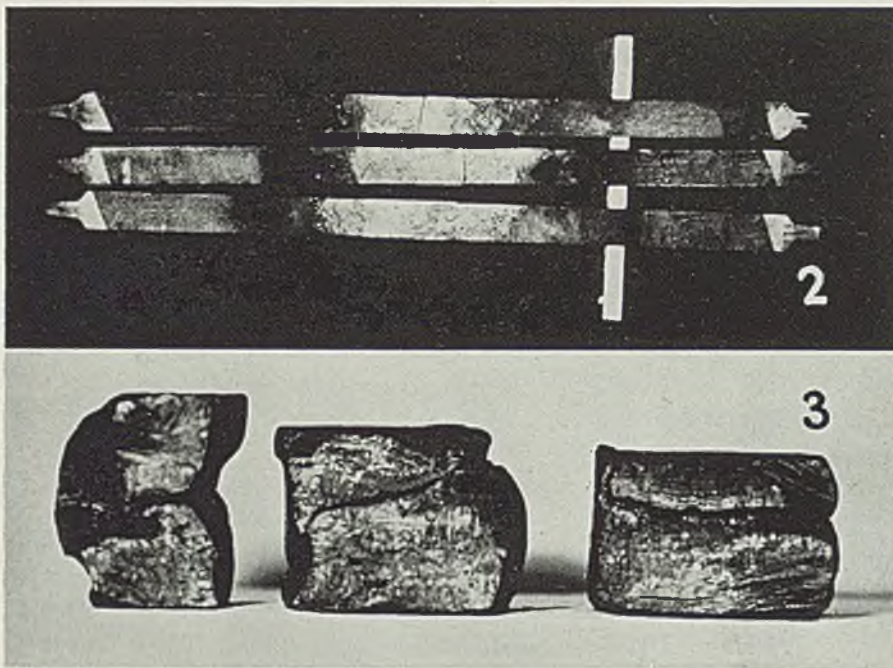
Expert work in making forge or plastic welds is shown here in these files of 1.40 per cent steel. Much skill is required to weld high-carbon steel by this method
